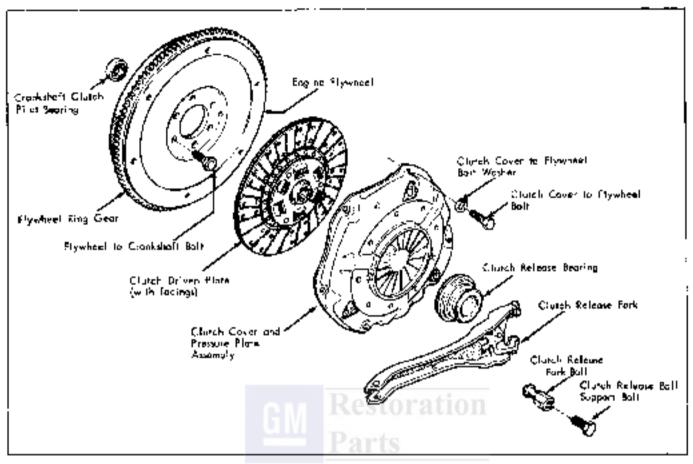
Exploded View of Clutch and Flywheel Assembly
